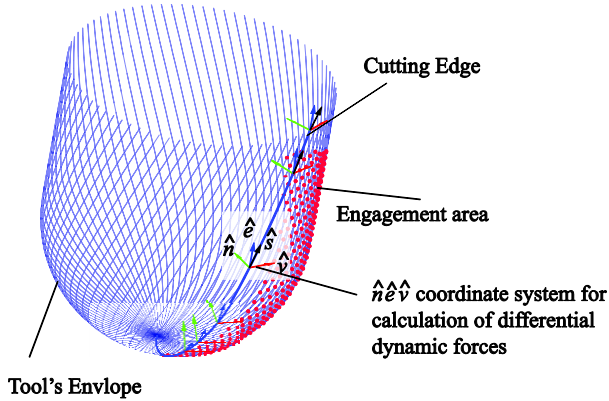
Geometry of cutting edge and engagement of the tool with the workpiece. $\hat{n}\hat{e}\hat{v}$ coordinate system, tool's envelope and engagement area are also shown
